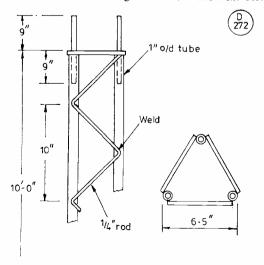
DETAIL OF LATTICE MAST CONSTRUCTION
